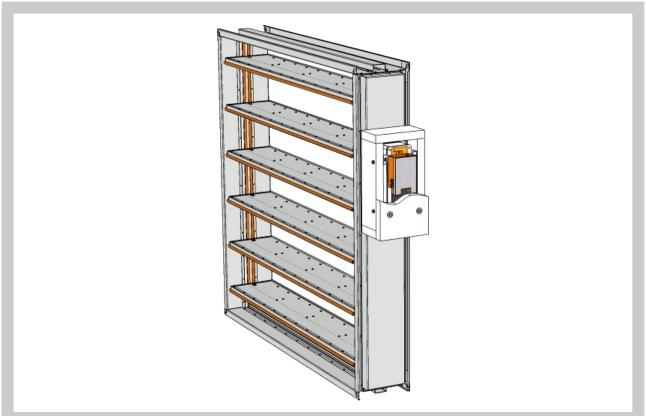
Damper SEDS-L - actuating machanism and BKNE in the cover
